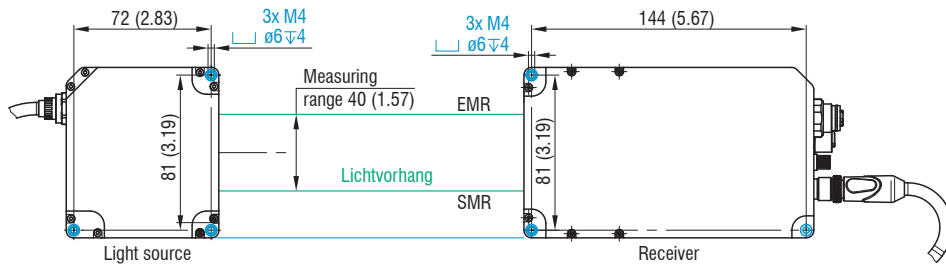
Mounting Thread for Direct Screw Connection, Dimensions Stated in mm
